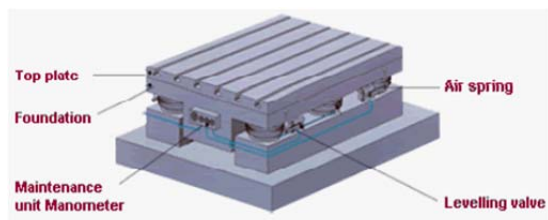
AIR SPRING SUPPORTED PLATFORM
